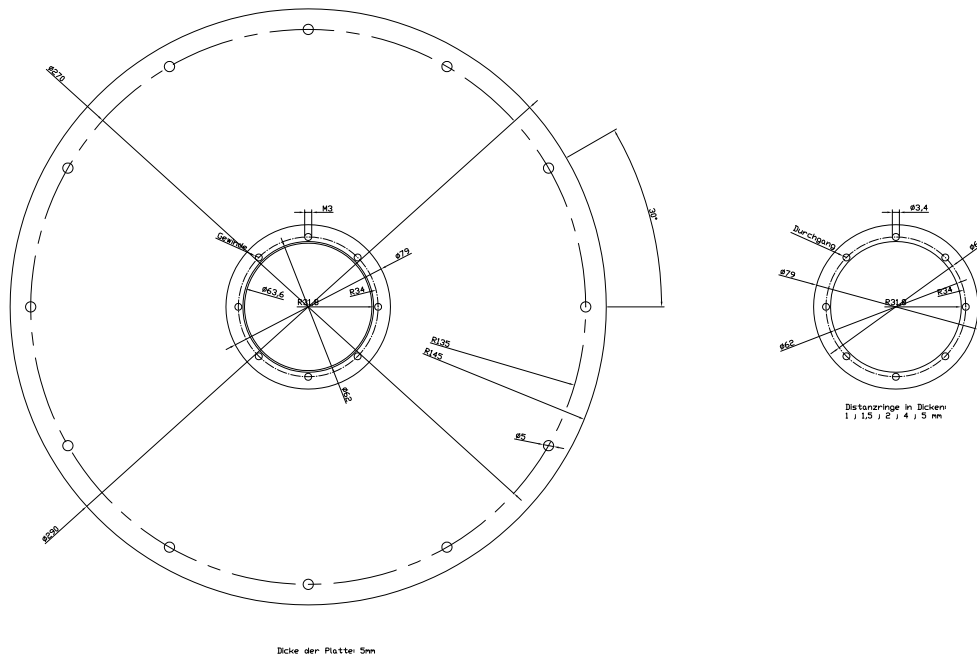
Left: Adapter ring to mount the fiber head to the central flange of the Hexapod-Telescope. Right: Adjustment rings.
